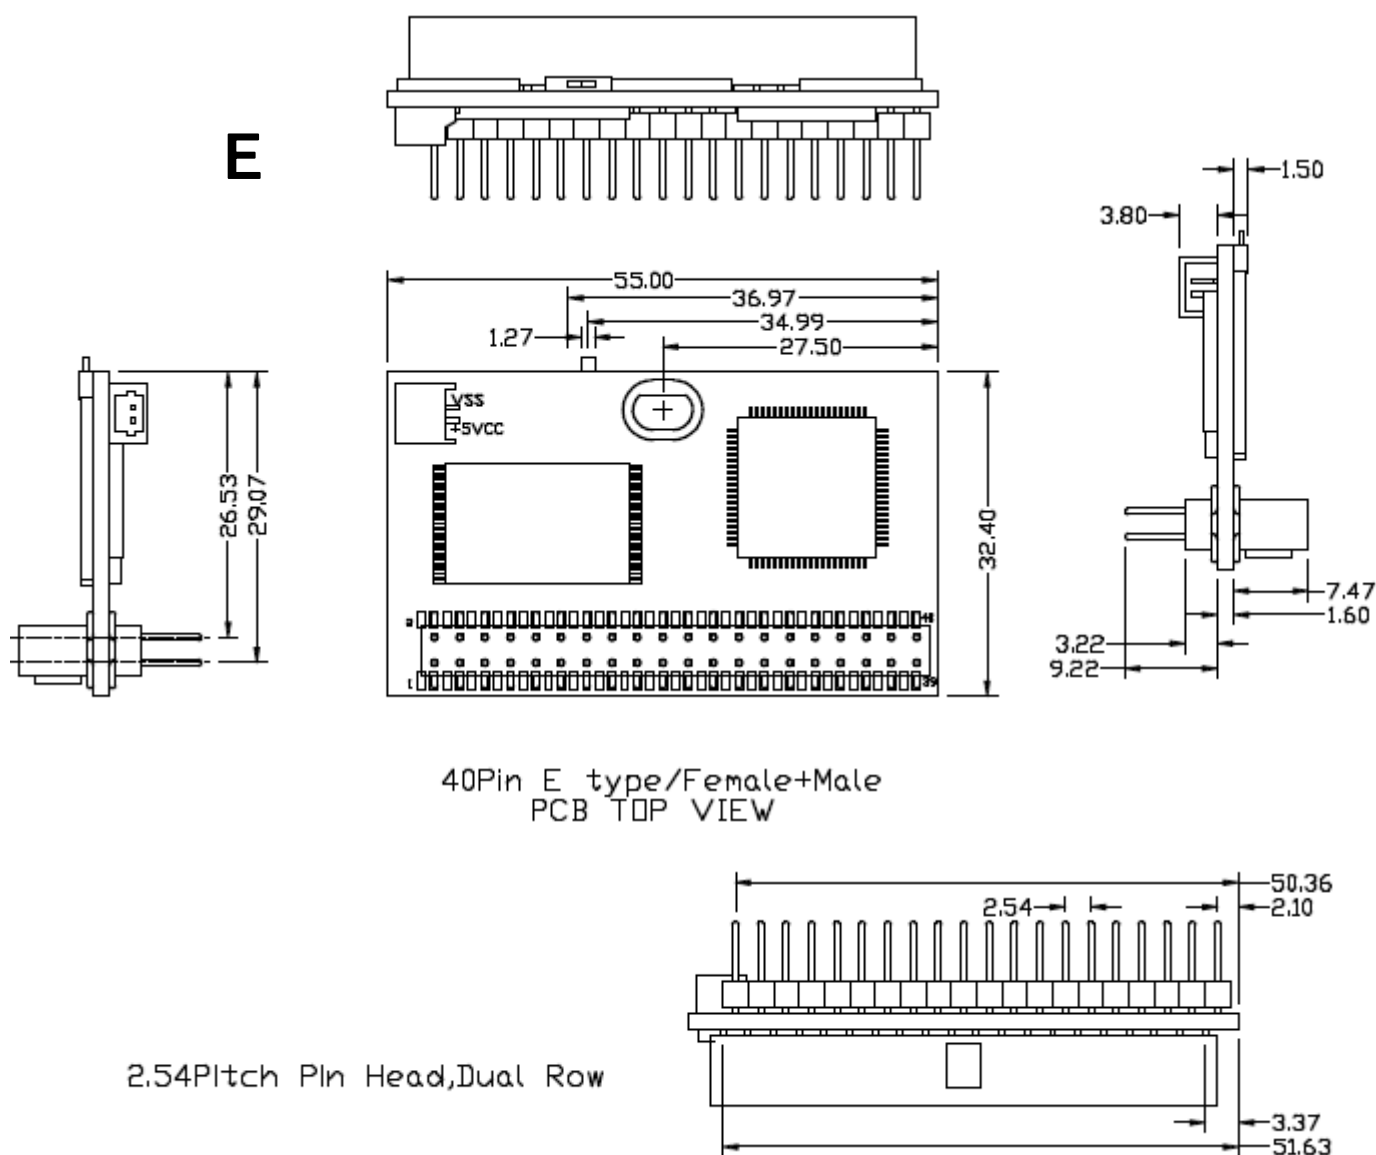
Mechanical Dimension of EDC4000 40-pin (Horizontal Female/Male Type E)
